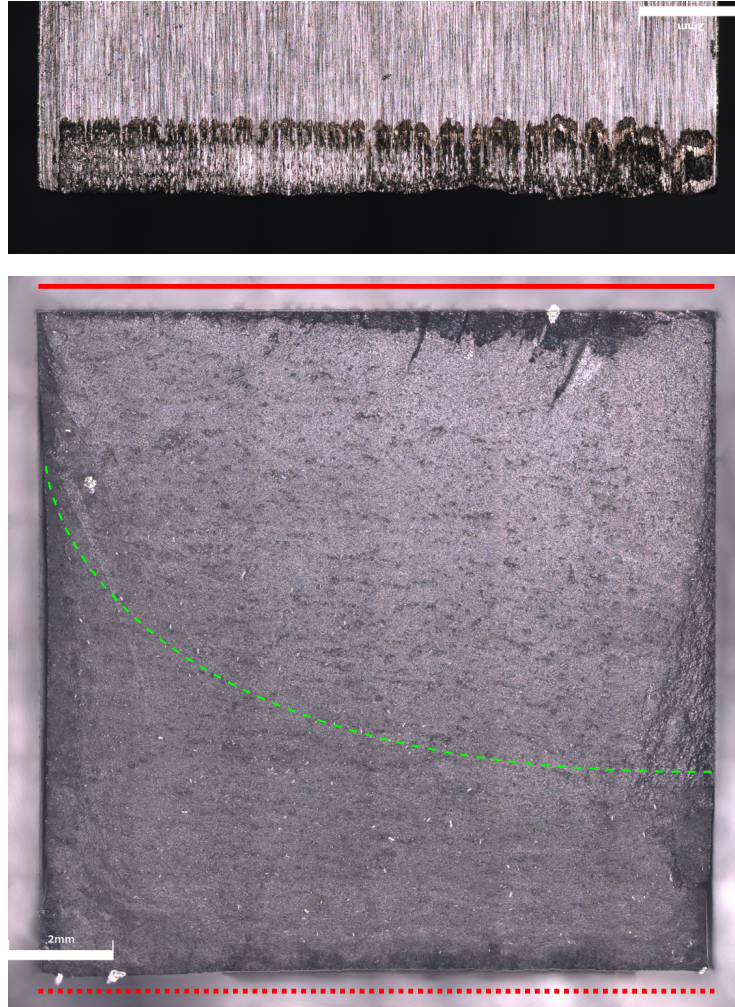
Fretting fatigue contact scar and fracture surface of a test for Inconel 718 at RT with constant contact normal load ff-in-rt-pc-01).
